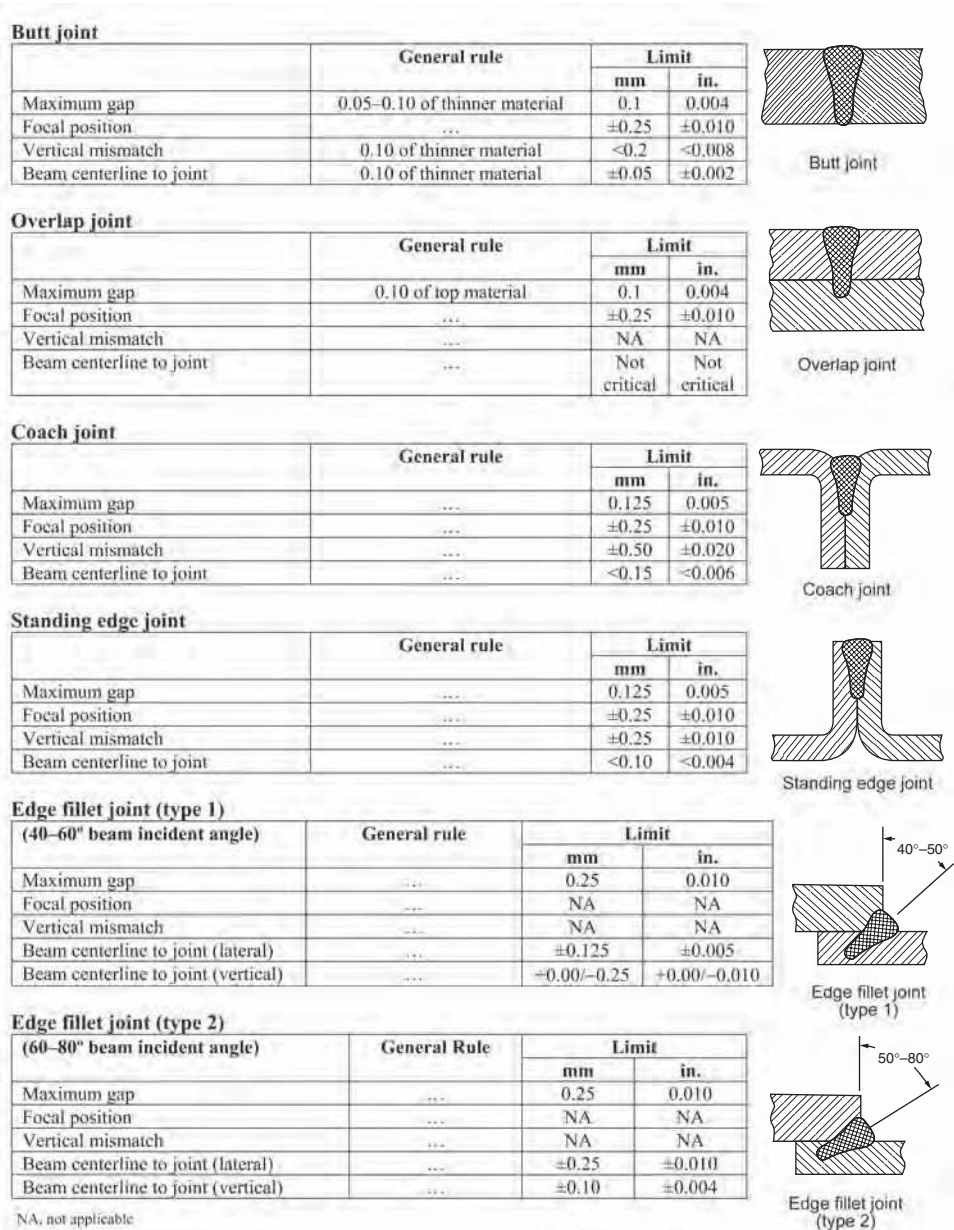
Gap limitations vary according to the joint configuration for penetration (keyhole) laser welding.
